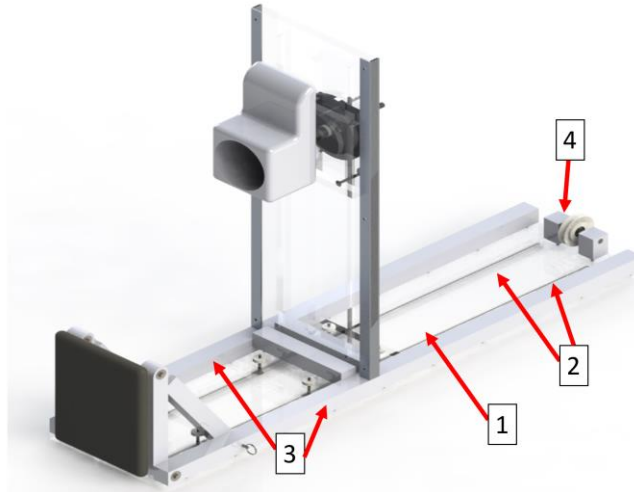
CAD Geometry of Long Base Plate Component in Bottom Base Assembly
